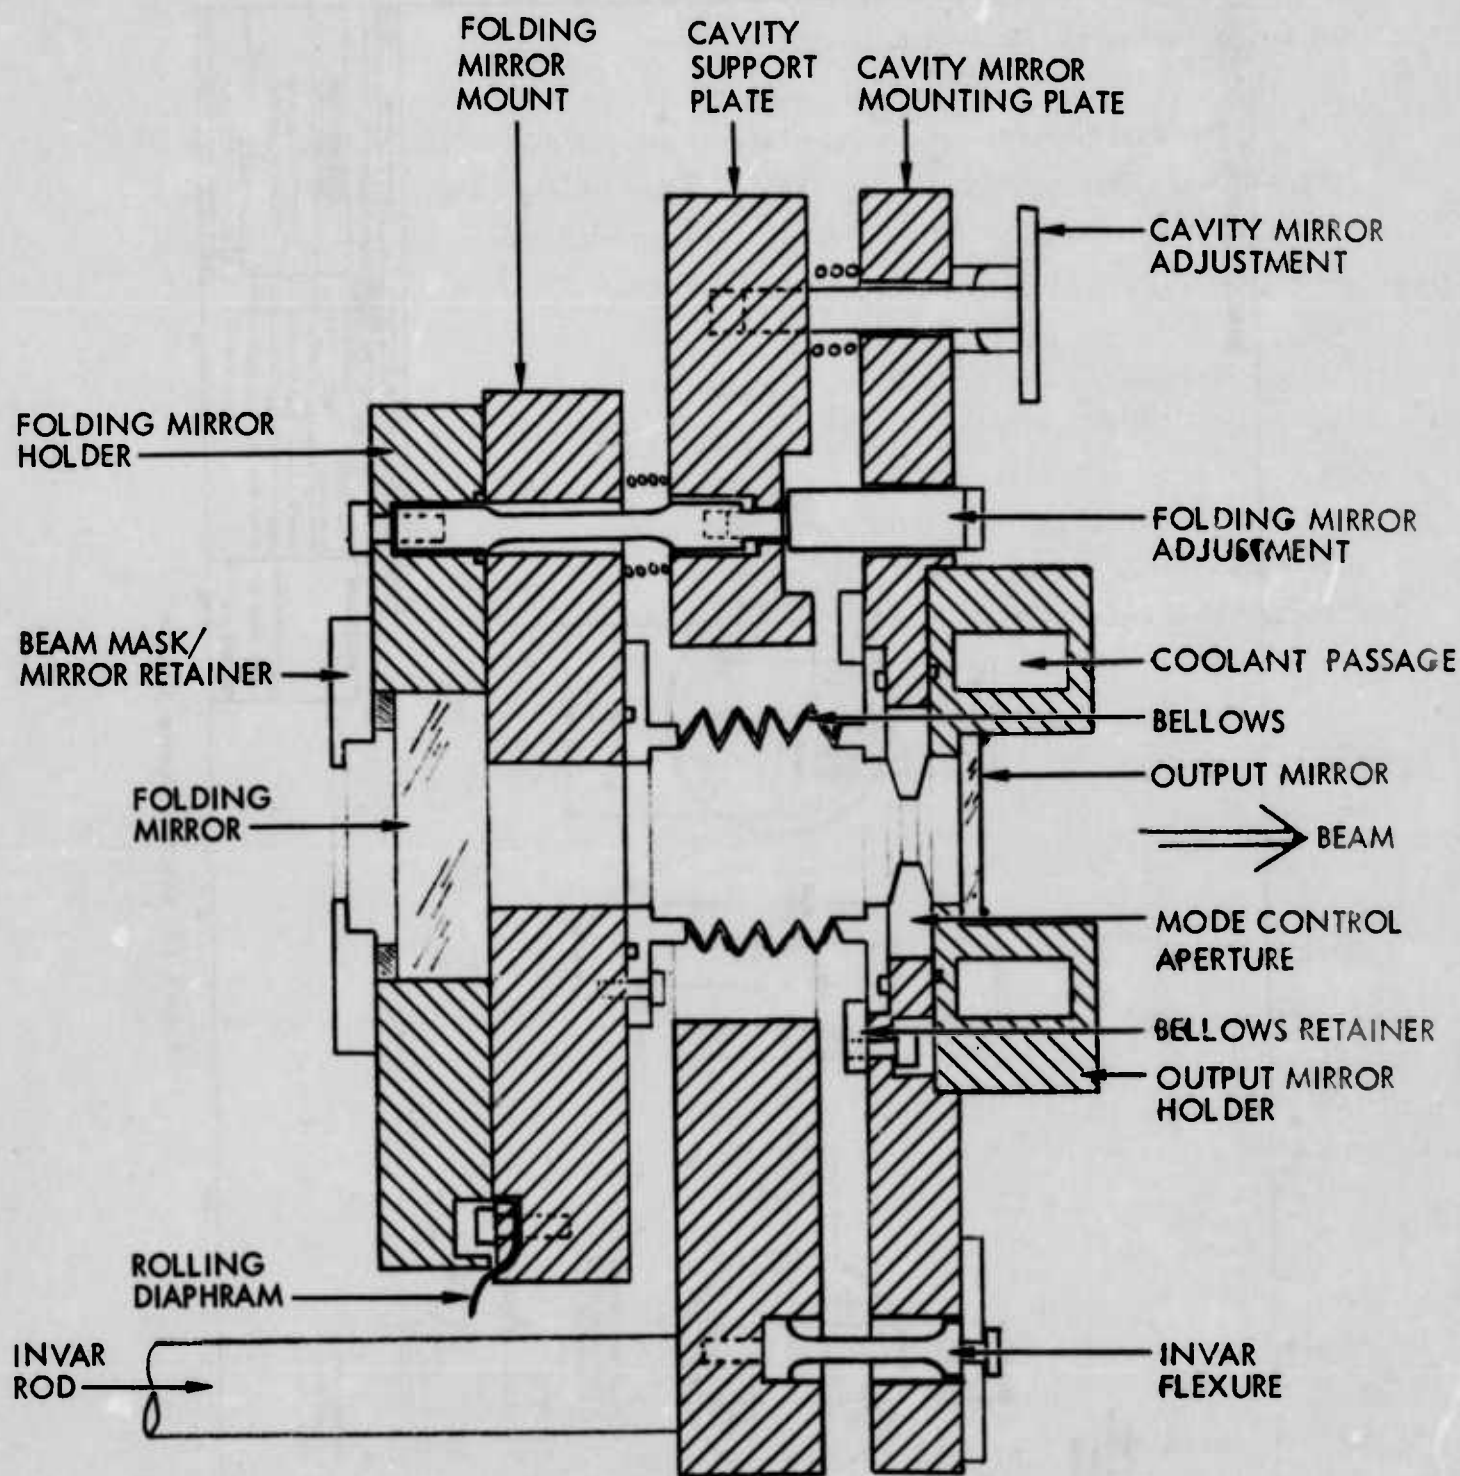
ONE END OF CAVITY ASSEMBLY
